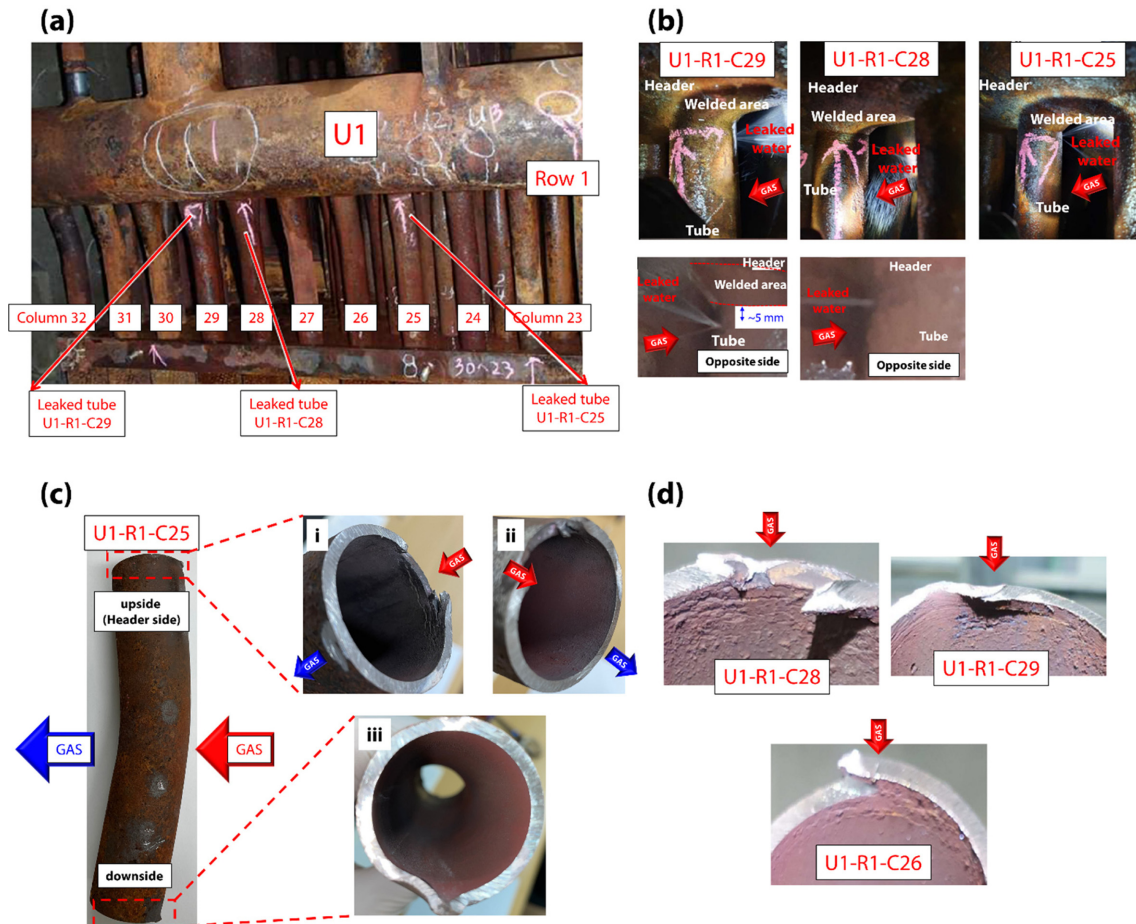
(a) Upper header joined with bent tubes and the positions of leaked tubes, (b) Leaked water from the failed tubes, (c) U1-R1-C25 tube sampled from the CPH and a magnified view (i, ii, iii), and (d) Inner surfaces of the leaked tubes
